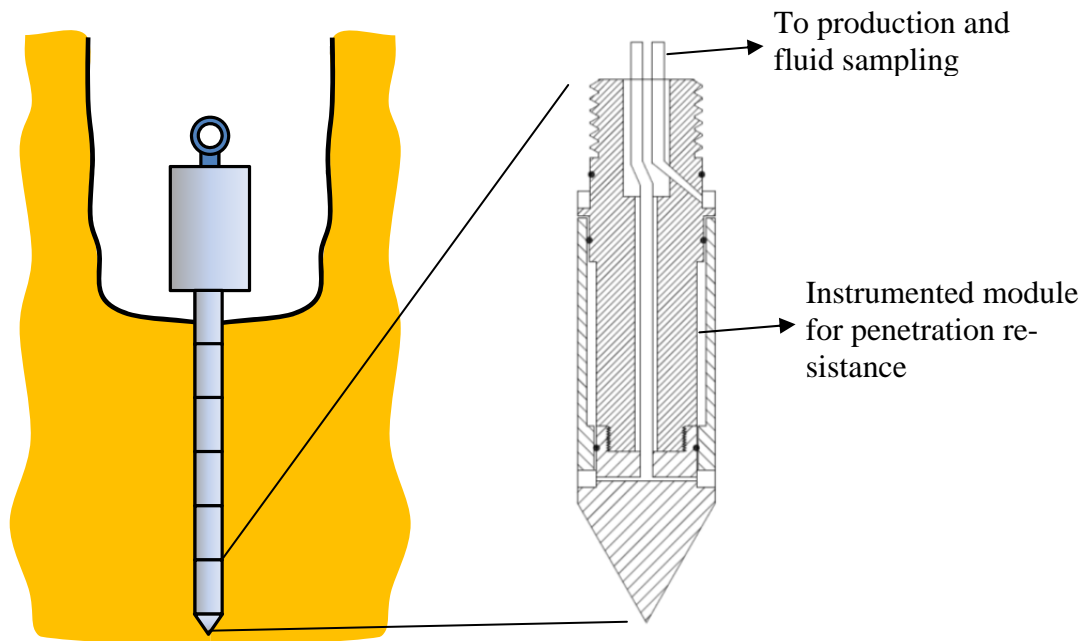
Borehole tool. a) Inserted tool; b) Penetration module.
